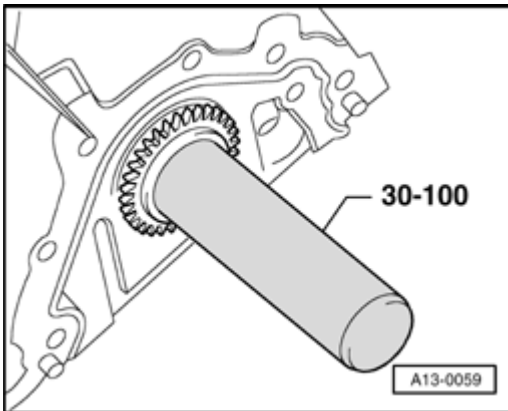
Installing Chain Sprocket Onto Crankshaft Up To Limit Stop Using Press Tube 30-100
